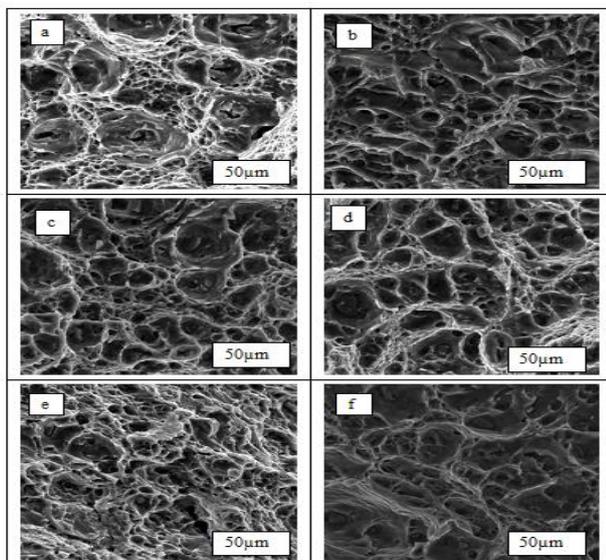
Fracture Surface of Impact Specimens at Various Conditions: (a) base metal AA5083 (b) base metal AA60061 (c) exp1: 560RPM,40mm/min,0⁰ (d) exp2: 560rpm,70mm/min,1⁰ (e)exp5:1120RPM,70mm/min,2⁰ (f)exp6:1120,100mm/min,0⁰ (high magnification)
